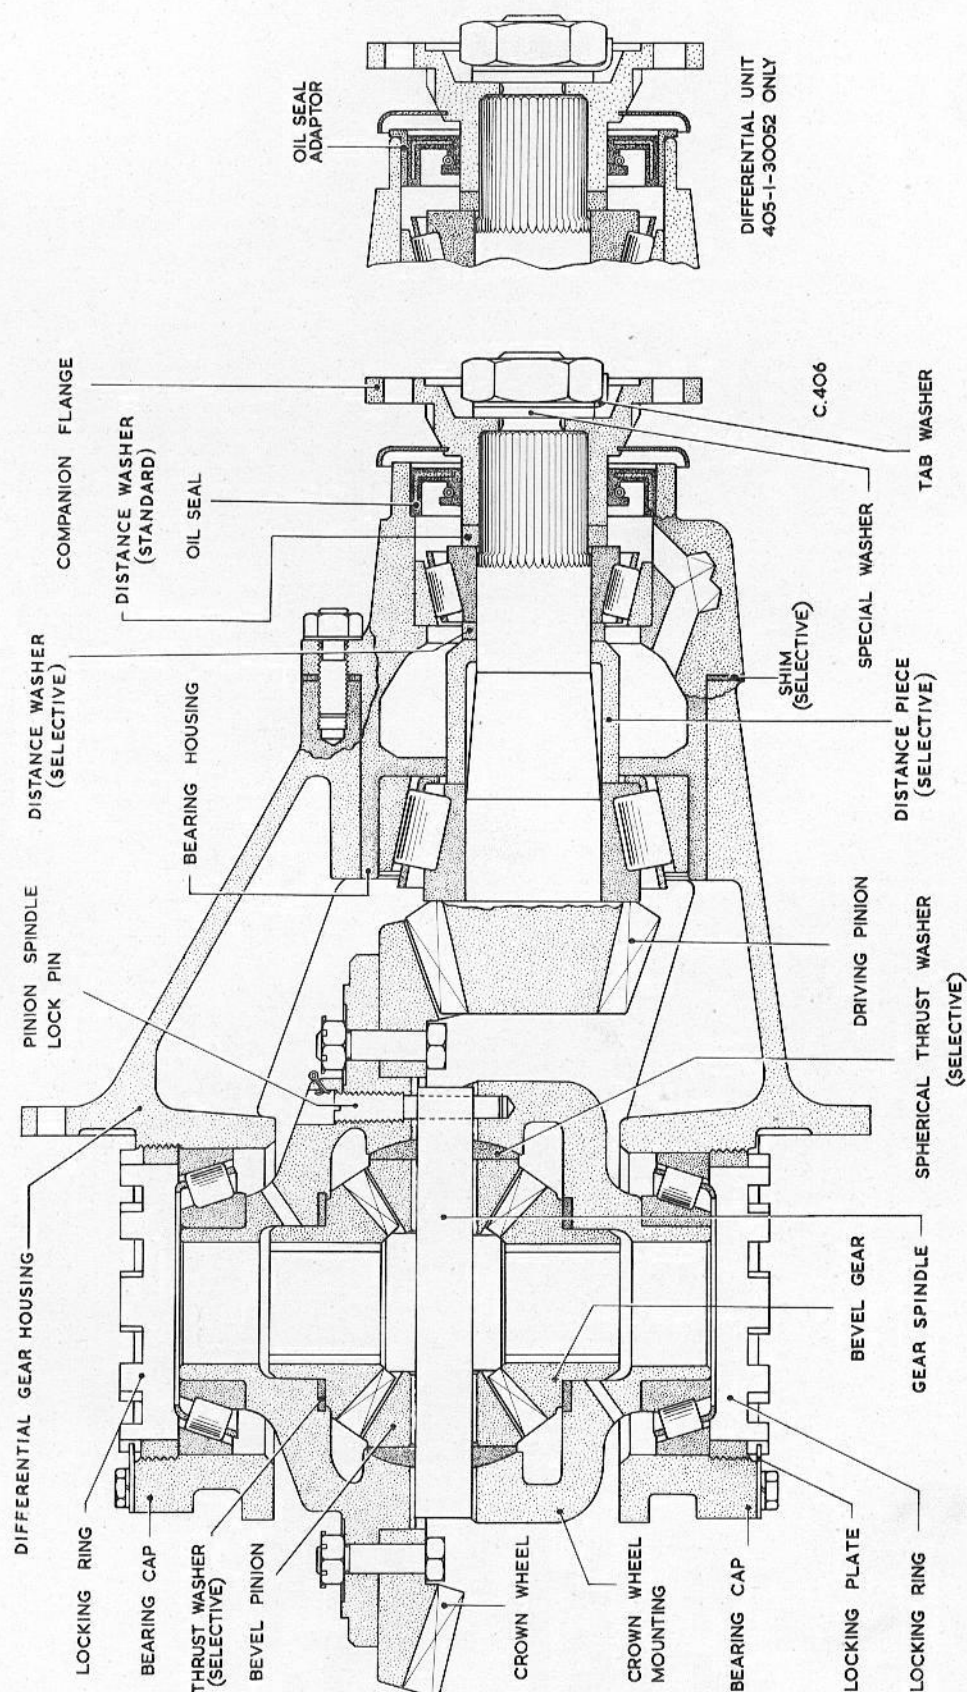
Assembly of differential unit (Detachable bearing housing)
